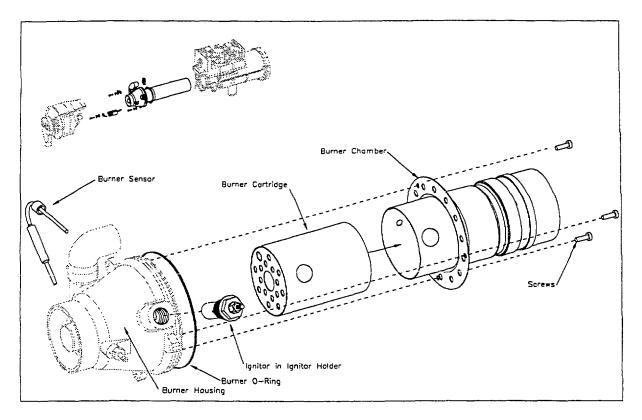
Burner Cartridge, Chamber, Wick, Igniter and Igniter Holder - aligned
